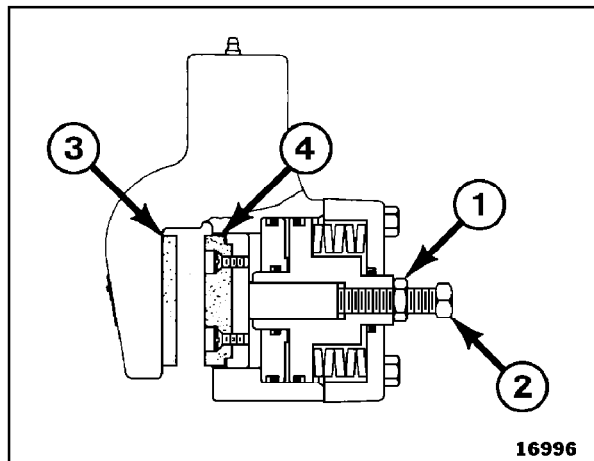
MANUAL RELEASE OF BRAKE CALIPER
